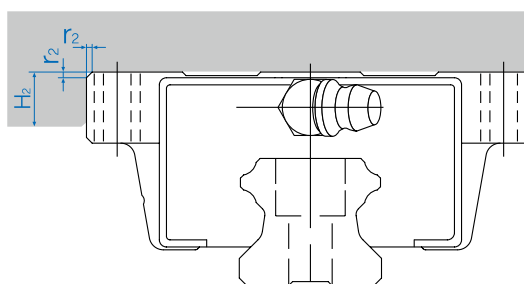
Dimensional tolerance between contact datum plane and mounting hole
